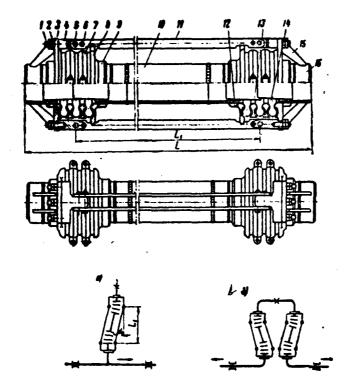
Compensator hinged doubled of the type KVSh. a) installation on the branch; b) installation in the U-shaped diagram; 1 - pins; 2 - nut; 3 - the carrier rings; 4 - link of the hinge joints; 5 - fulcrum; 6 - bolts; 7 - limiting semirings; 8 - the carrier rings; 9 - strip rings; 10 - spacer duct; 11 - draft (illegible); 12 - shell cylindrical; 13 - pliable corrugated elements/cells; 14 - conical shell; 15 - connection plate; 16 - branch connections.
